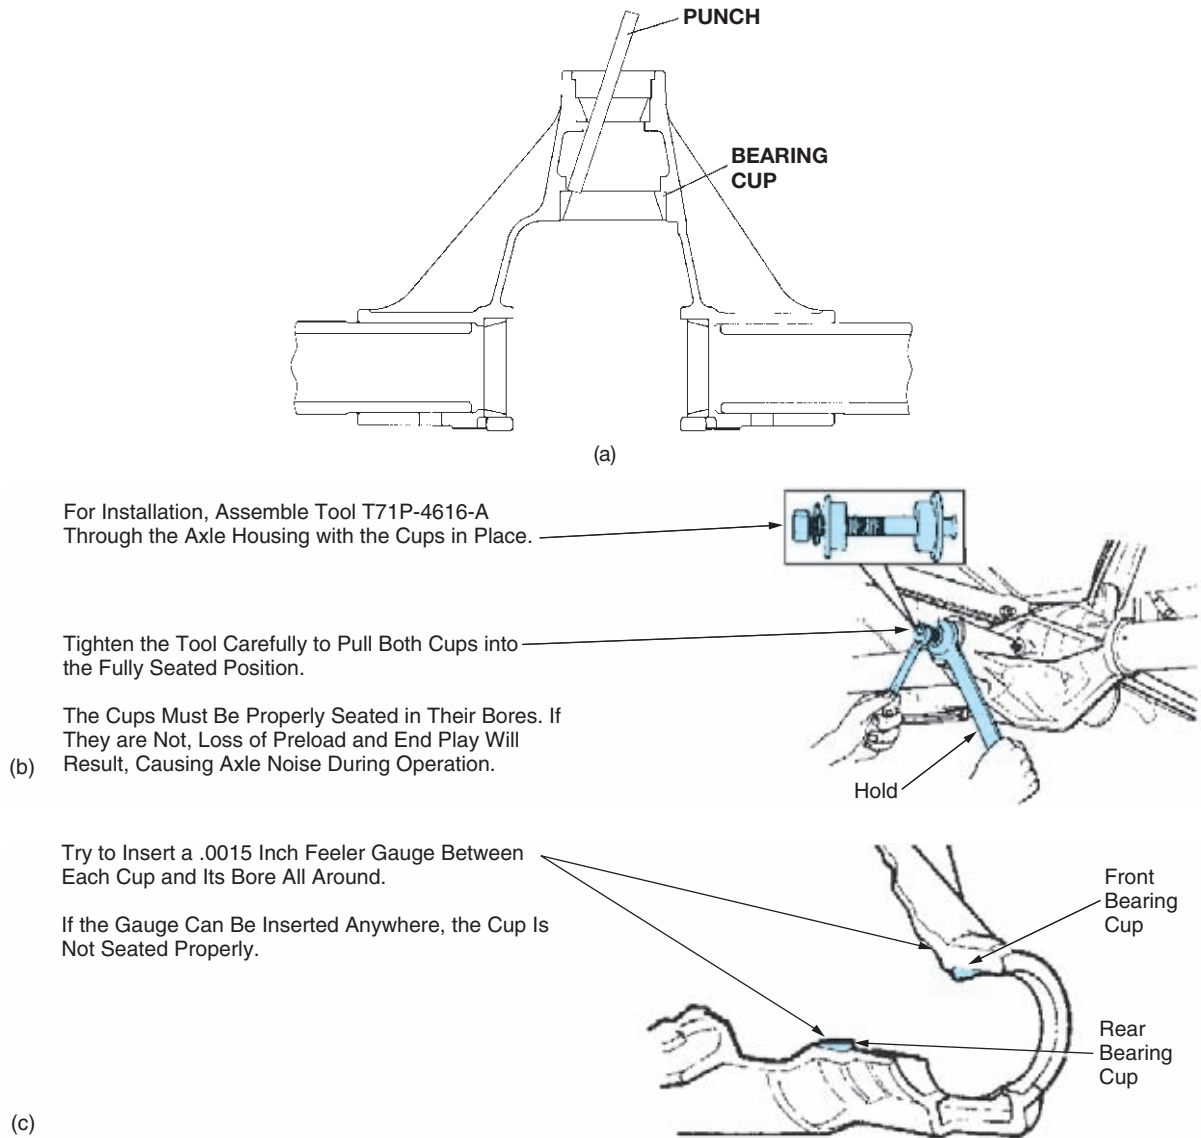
A damaged bearing cup can be driven out of the housing using a long punch (a). A special tool can be used to pull the new bearing cup into position, making sure that it is completely seated (b and c). (Courtesy of Ford Motor Company)
